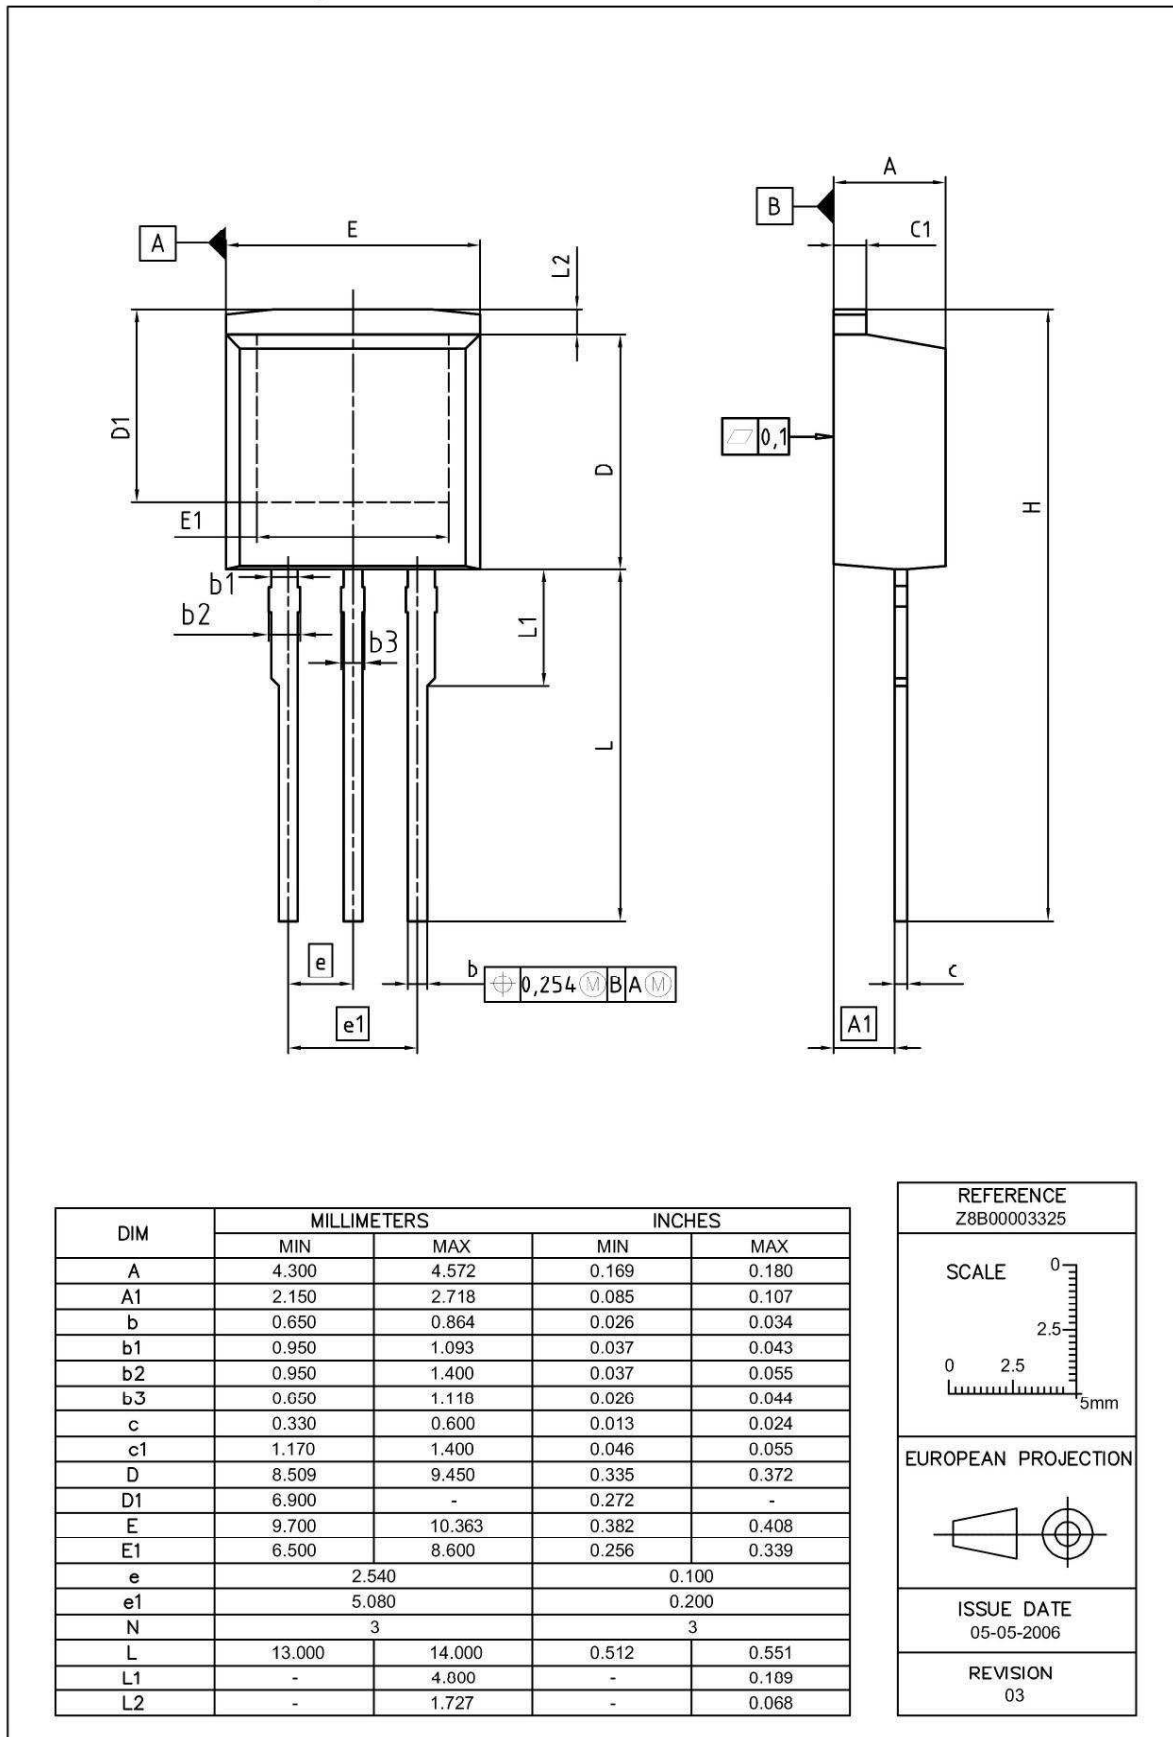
Outline PG-TO 262, dimensions in mm/inches
